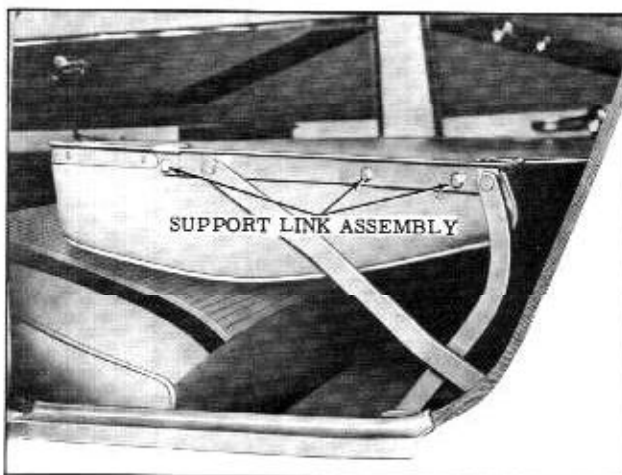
Folding Seat Back Mounting Support Link Assembly
